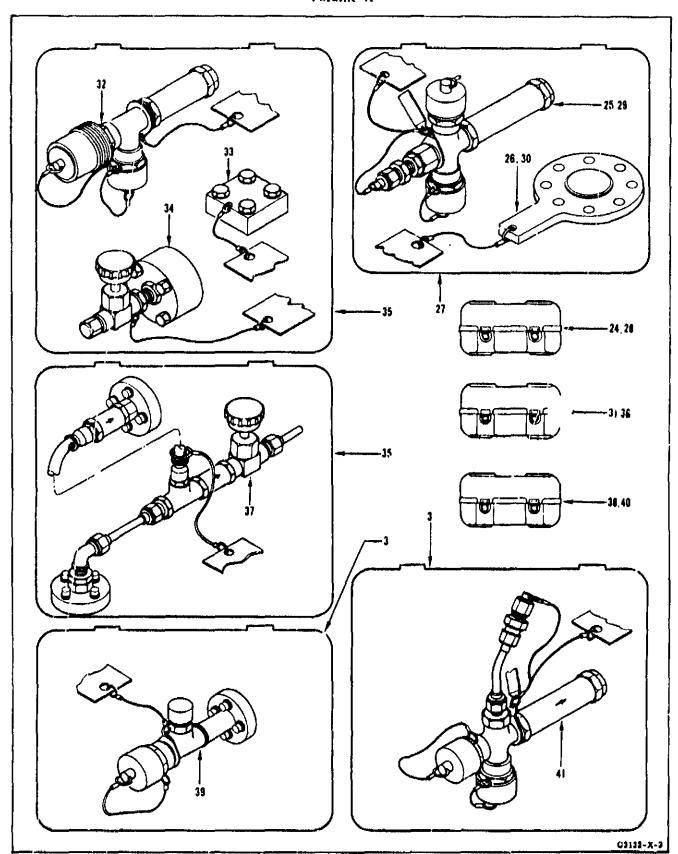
Test Plate, Plug, and Tool Set (Sheet 2 of 7)
